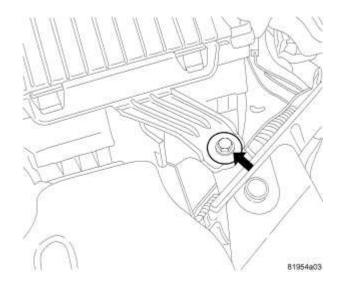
Removing Throttle Body Hose Clamp Courtesy of CHRYSLER LLC
